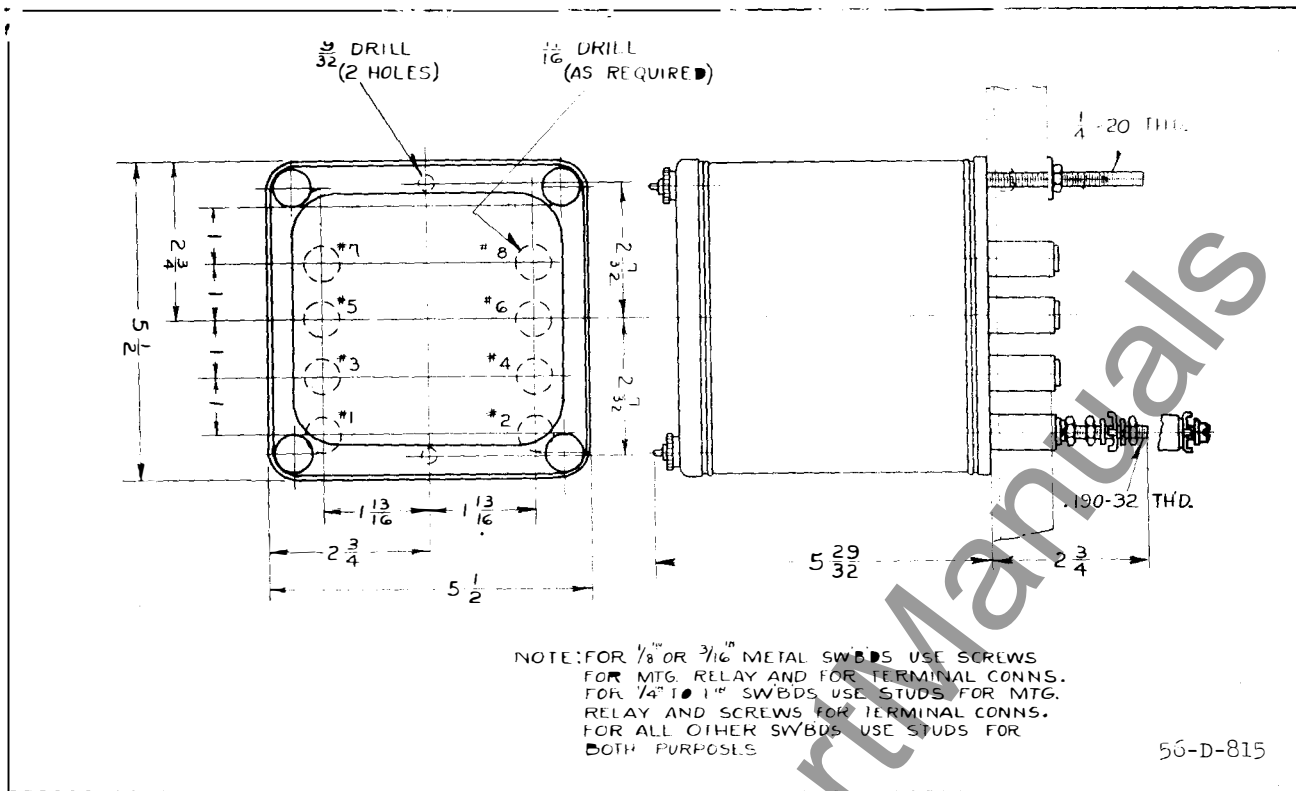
Outline and Drilling Plan for the Type TH Single-Element Relay.
